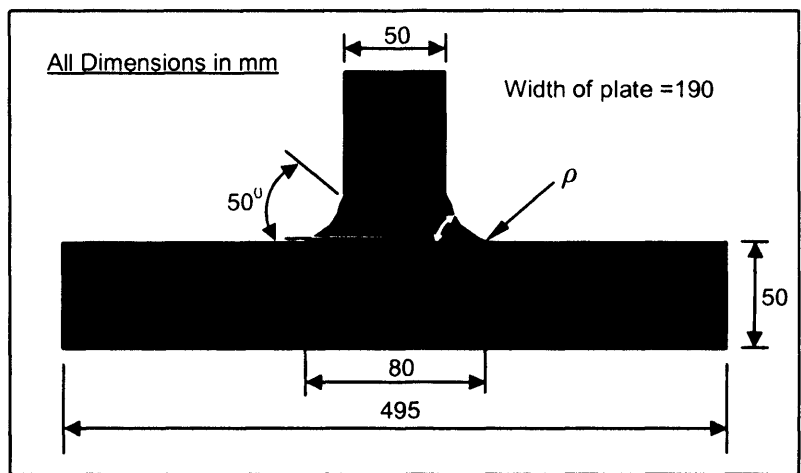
Dimensions of T-butt welded specimens
